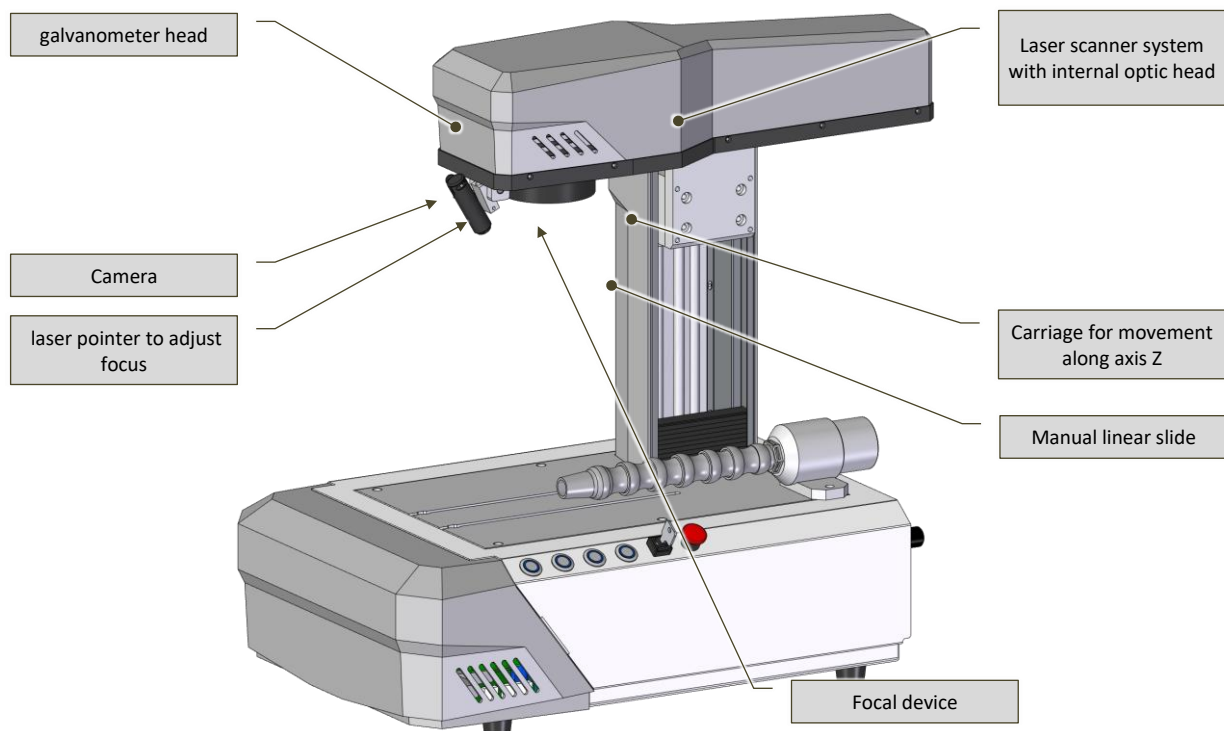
Laser scanner system – view of machine without access door to marking area
